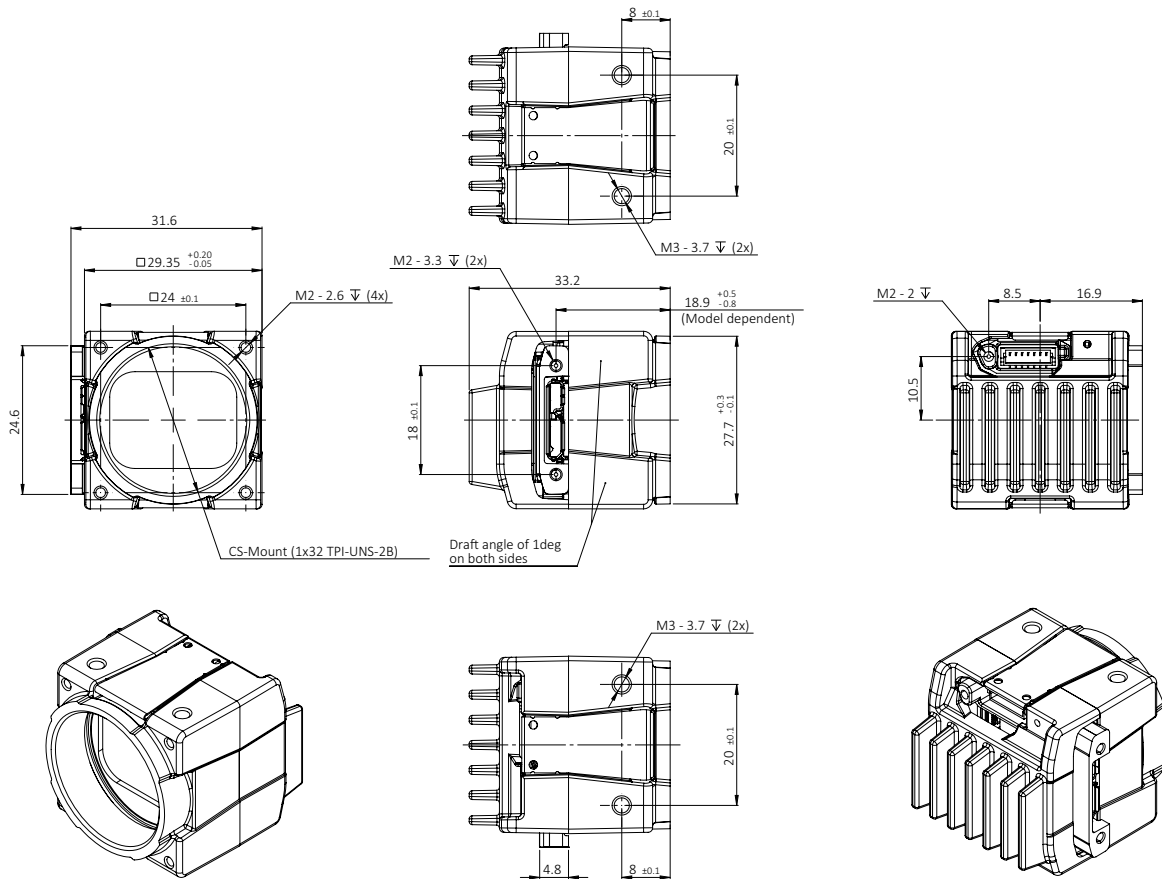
Closed Housing CS-Mount 90° (standard Alvium) dimensions
